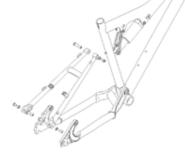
Attached seatstay (4) to front triangle (1), exploded
